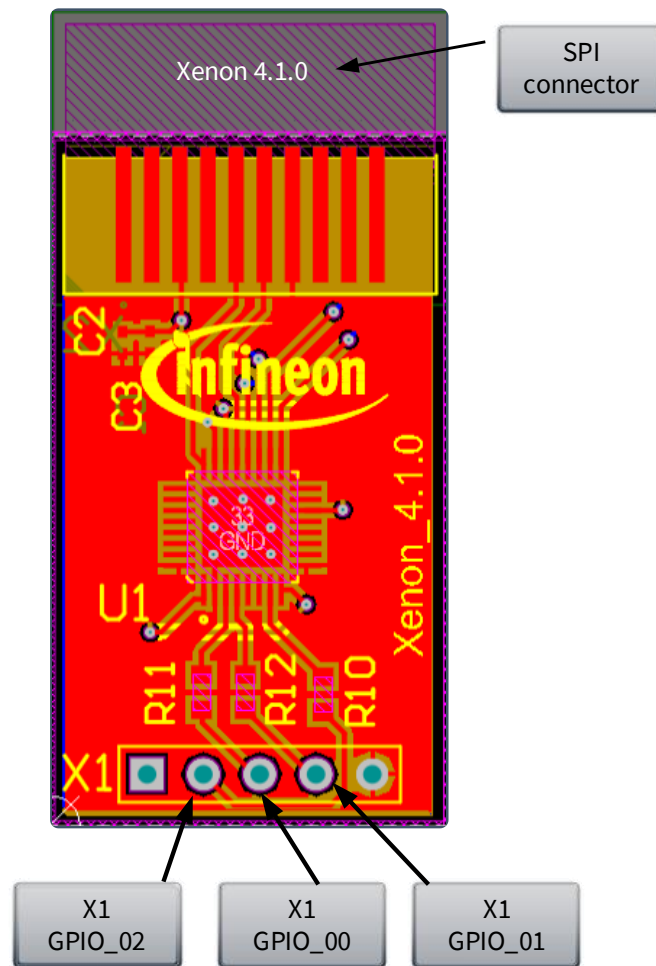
Top view of Xenon - SPI TPM board PCB for SPI TPM
